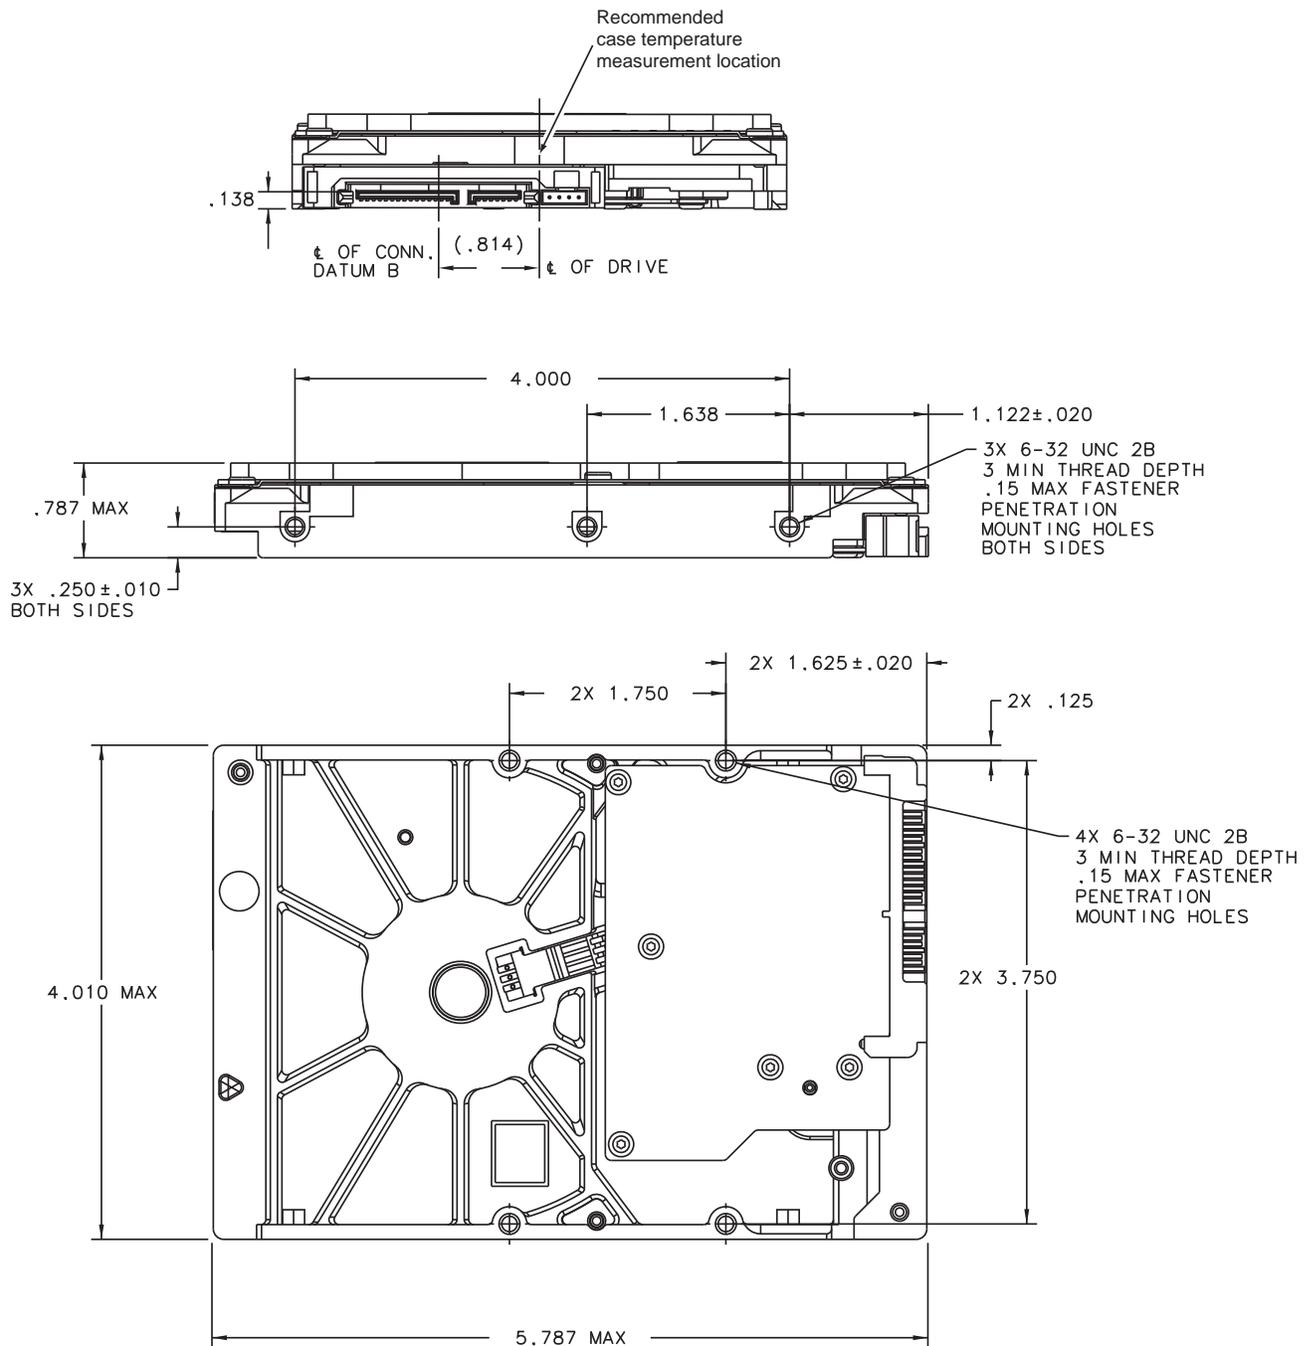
Mounting dimensions (500, 320, 250 and 160GB models)
